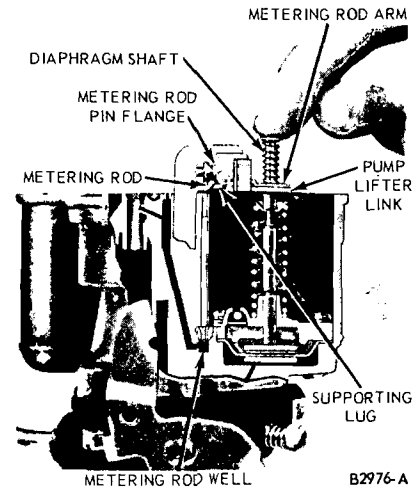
Metering Rod Adjustment — Carter Model YF 1-V
